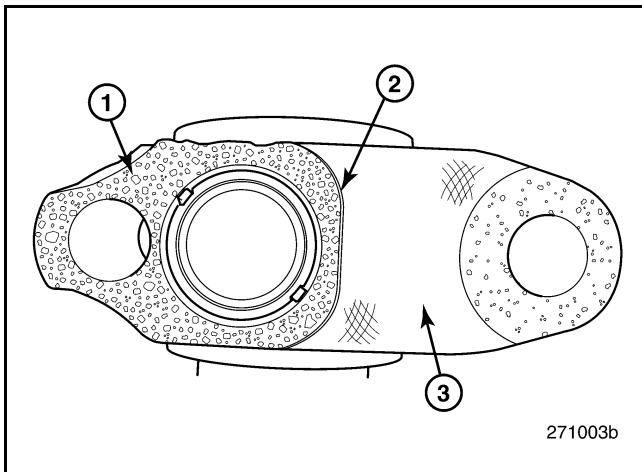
Rocker Shaft Mounting Bracket Showing Signs of Fretting Damage
